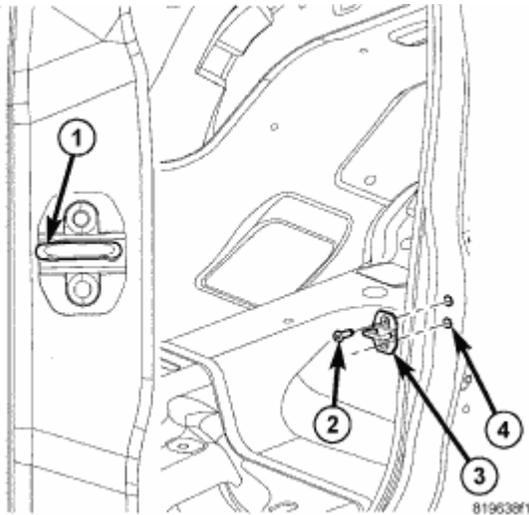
Striker Loop, Bolts, Striker & B-Pillar
